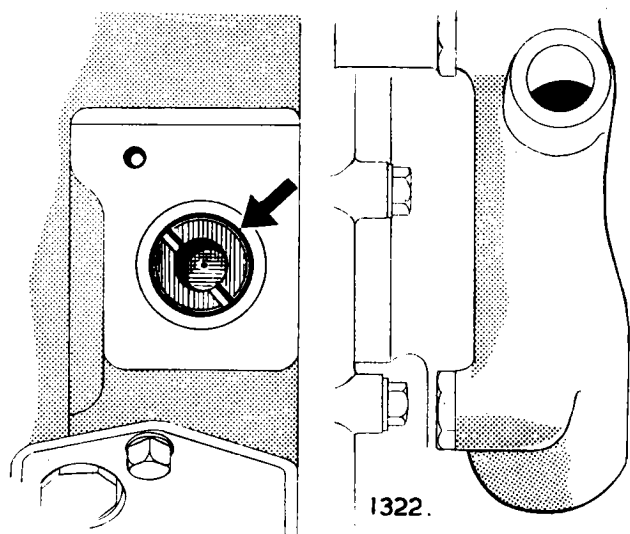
Showing the position of the distributor drive shaft offset when No. 6 (front) piston is on Top Dead Centre.
